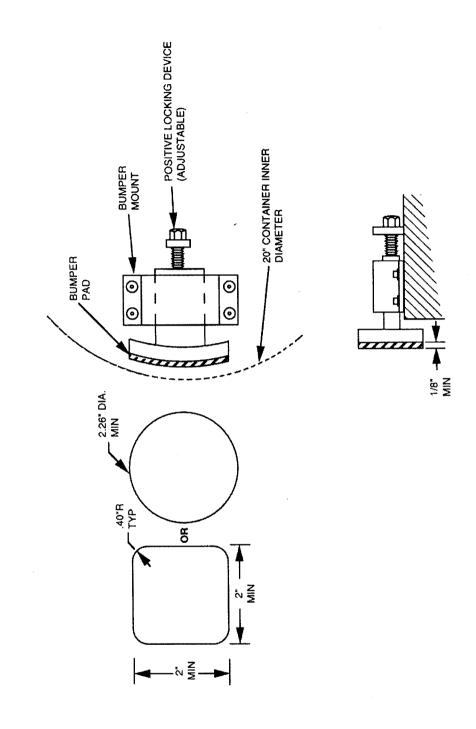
BUMPER DESIGN EXAMPLE
